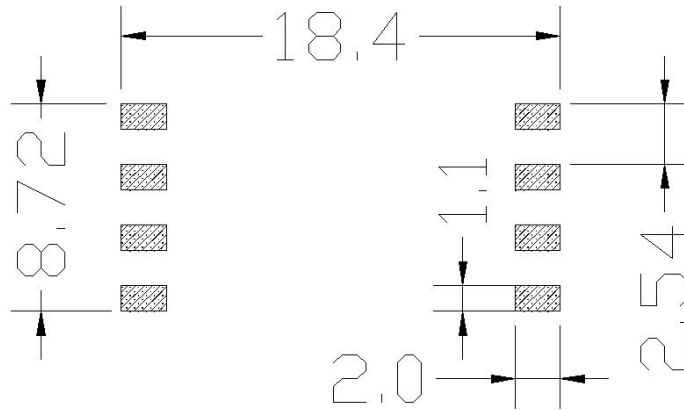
Recommended PCB Design Dimensions for ADP3000, Unit (mm)
